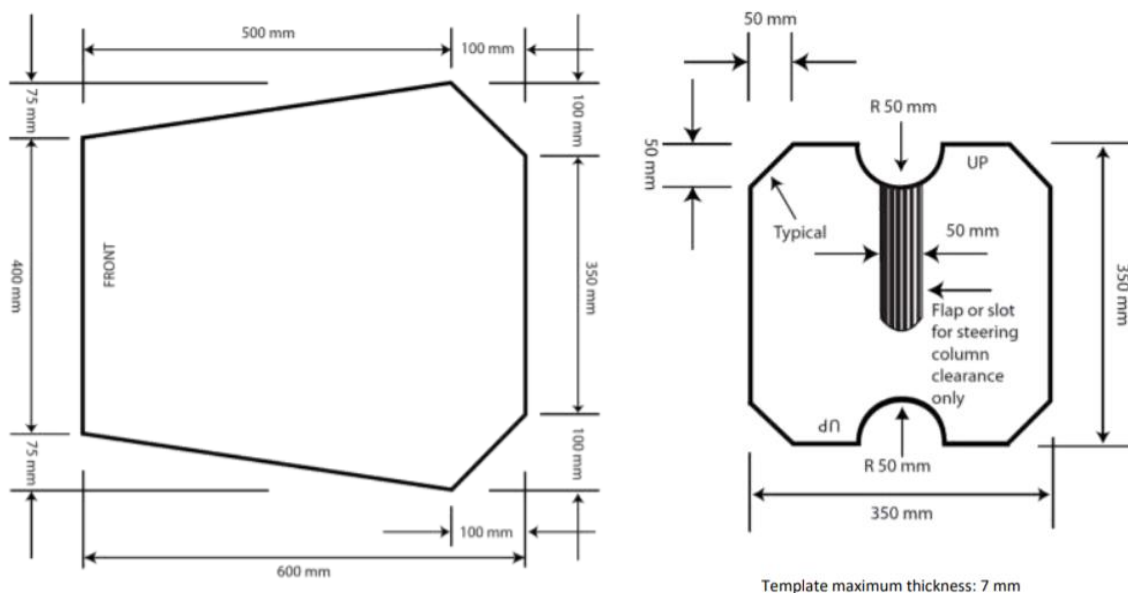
Cockpit opening template (left) and cross-section template (right) as specified in the 2020 Formula SAE rules.
